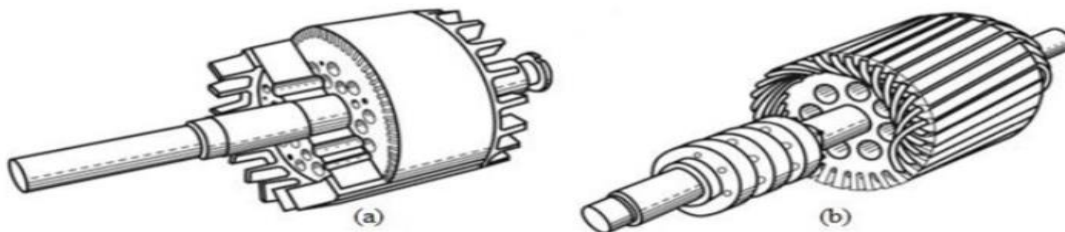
Rotor construction, (a) Cage rotor and (b) Wound rotor induction motor rotor types.
